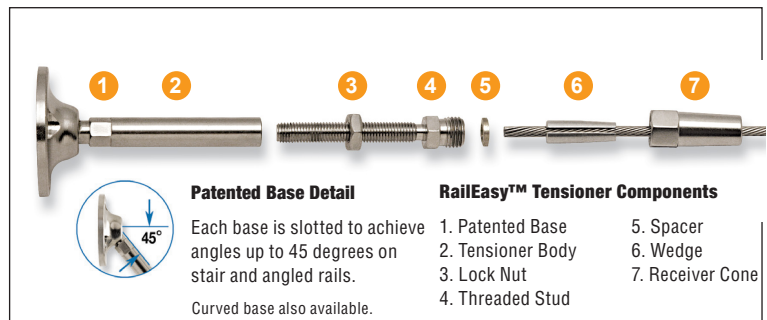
Figure E. Exploded view of the RailEasy™ Tensioner for easy identification of each component.
